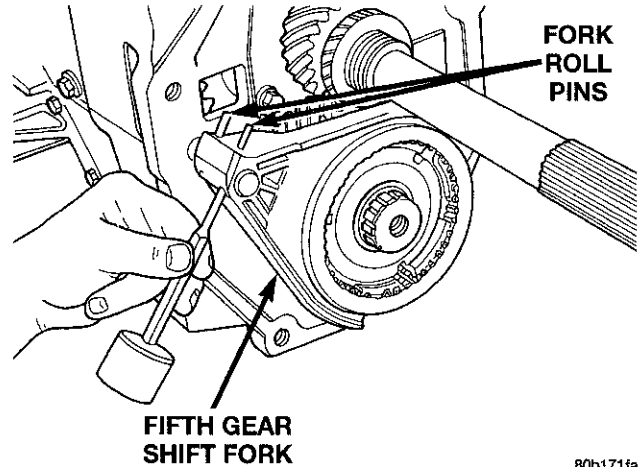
Removing Fifth Gear Shift Fork Roll Pins
